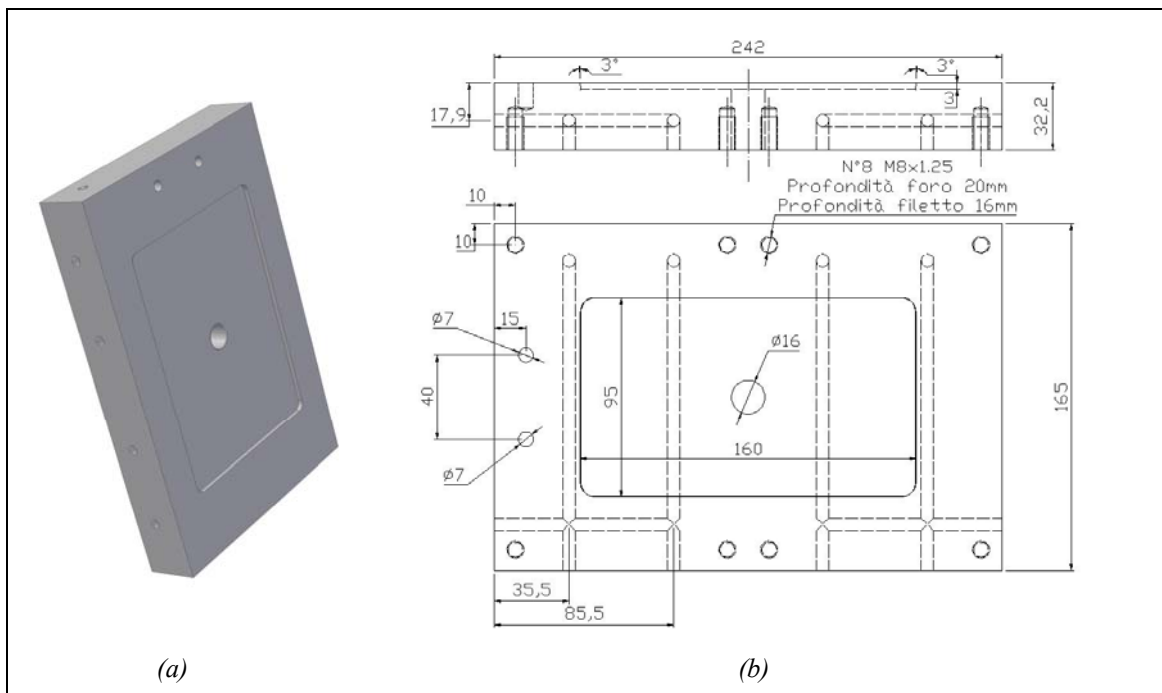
The fixed insert: (a) 3D model; (b) working drawing.
